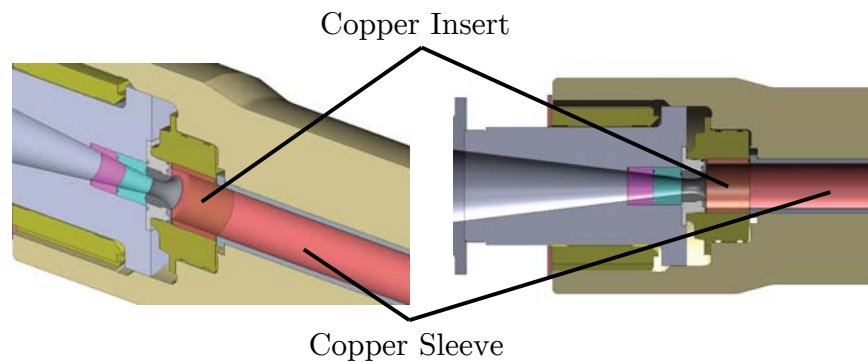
The copper sleeve and insert at the shock tube end. This is a larger view from Fig. 1.
